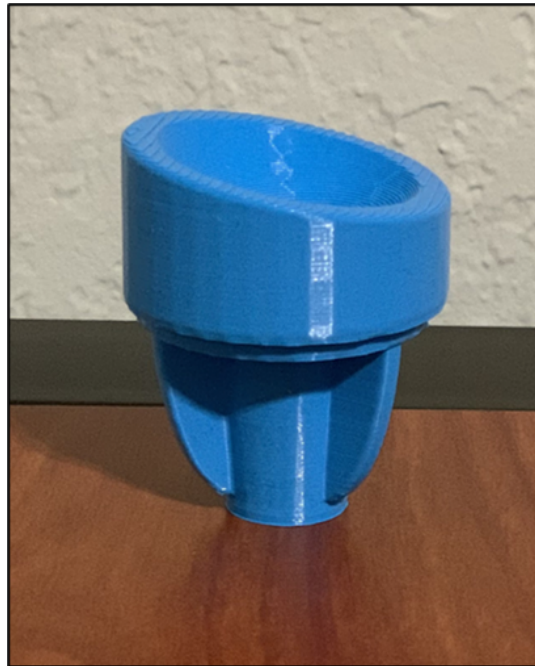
The exactech-like model that has been modeled in CAD and printed using the Lulzbot TAZ Pro 3D printer and is made out of Pro PLA filament.
